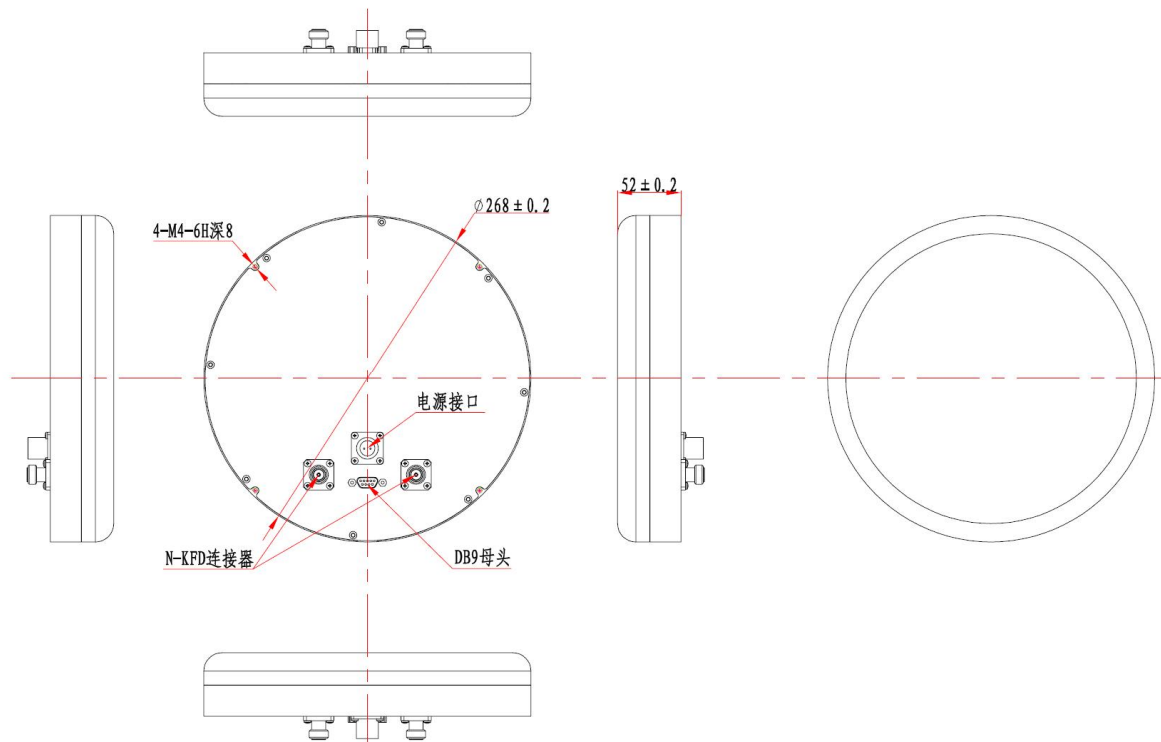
Dimensions (The tolerance marks shown for reference only)
